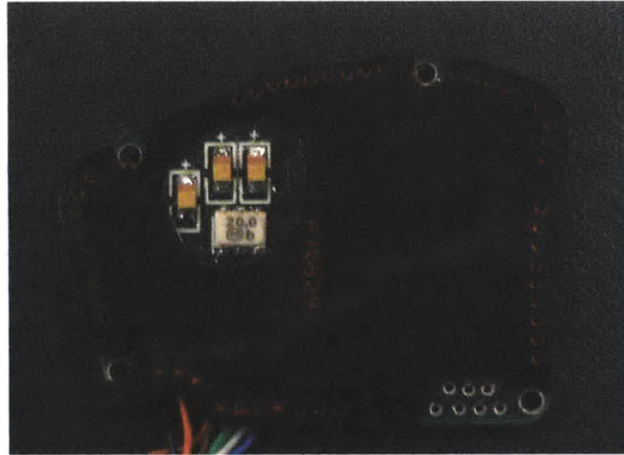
The Kapton Film which Divides the Mechanical Spring Housing from the Mid-Hand Circuit Board
